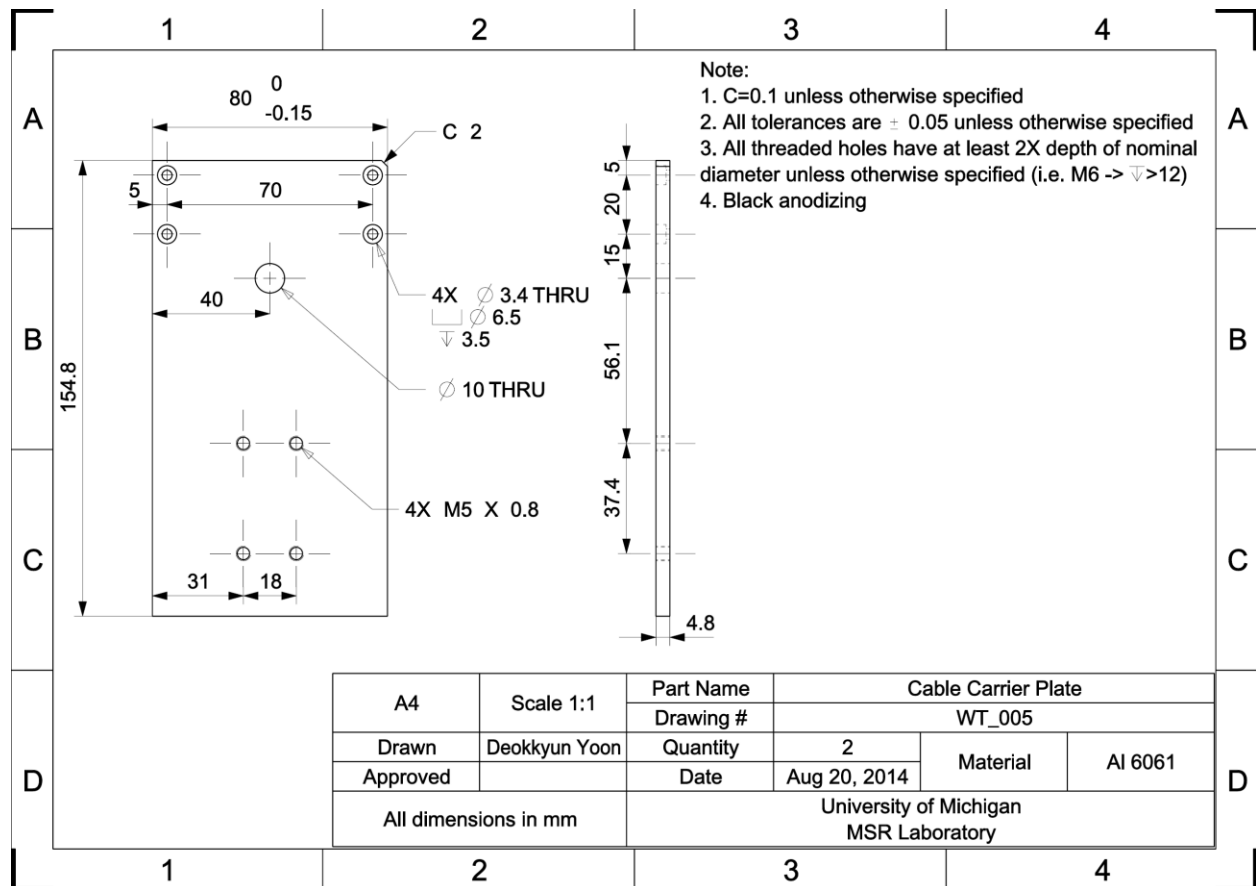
Manufacturing drawing of Cable Carrier Plate.
